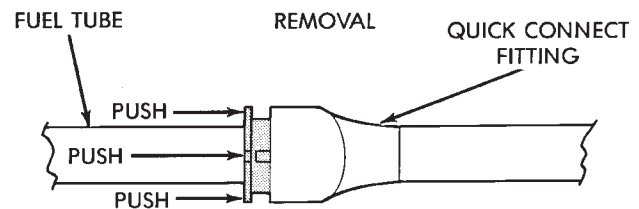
Removing Quick-Connect Fitting—4.0L Engine
